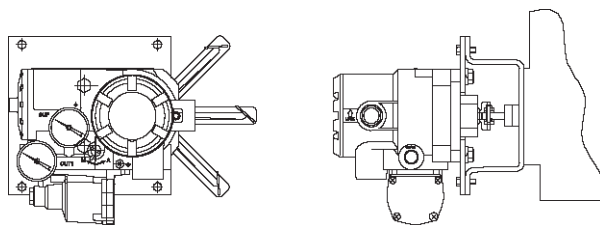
Checking Position at Which Clamp Should Be Fixed
